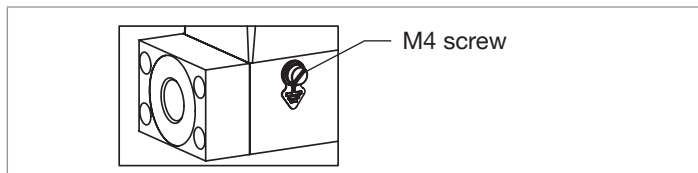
Location of the M4 screw for the connection of the functional-earth cable and the connection of the cable shielding
